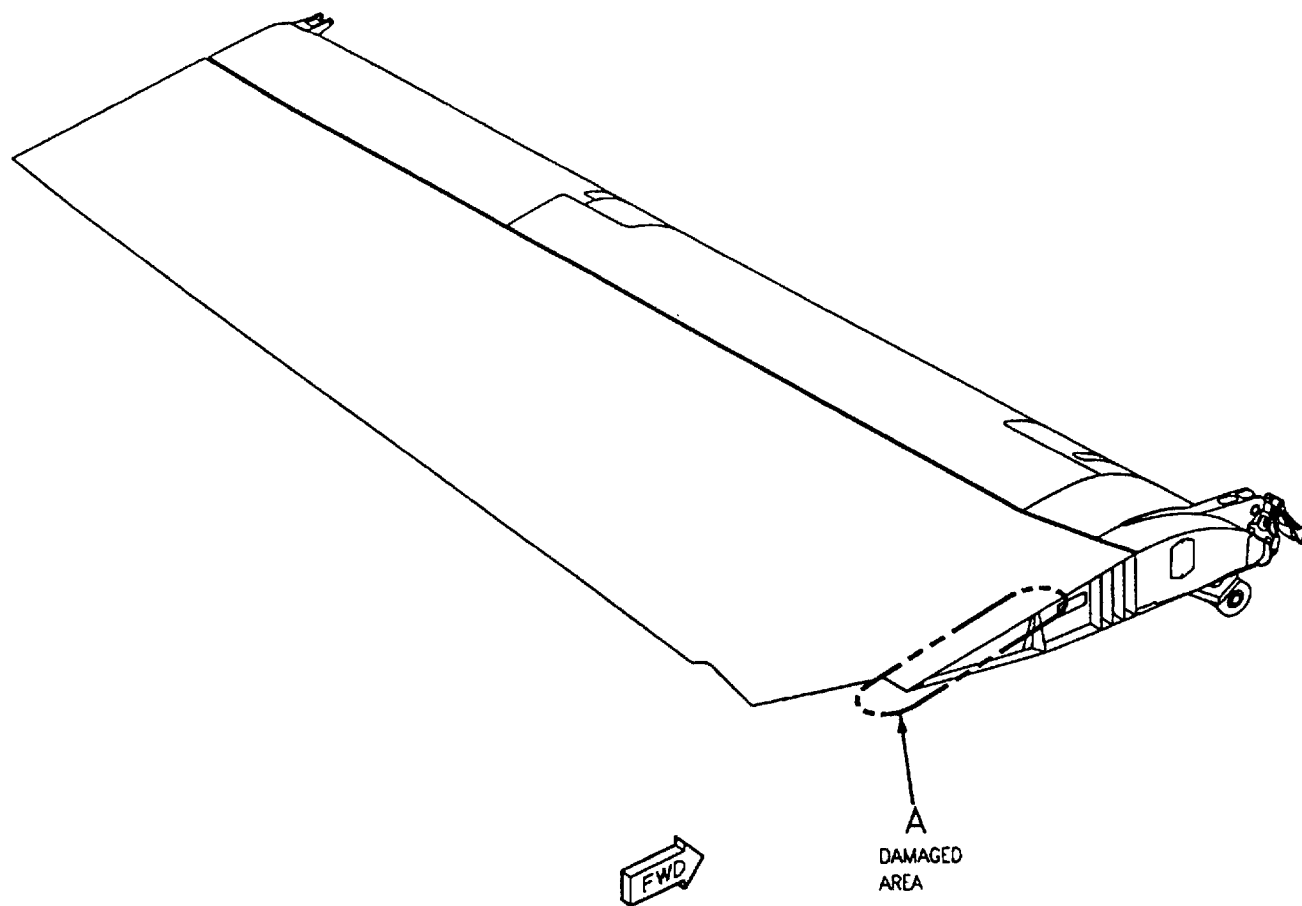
Inboard Aft Closure Rib and Skin Damage Repair (Sheet 1)
